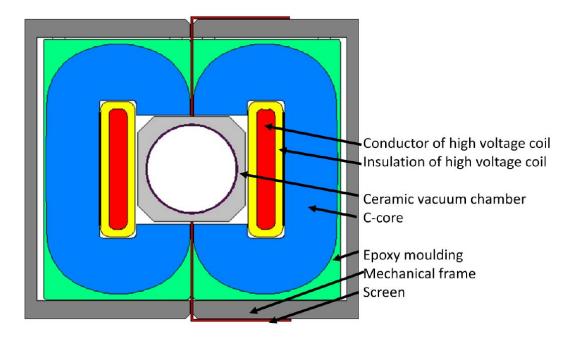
Side view cut of stacked C core magnet structure for the MKQA kickers
